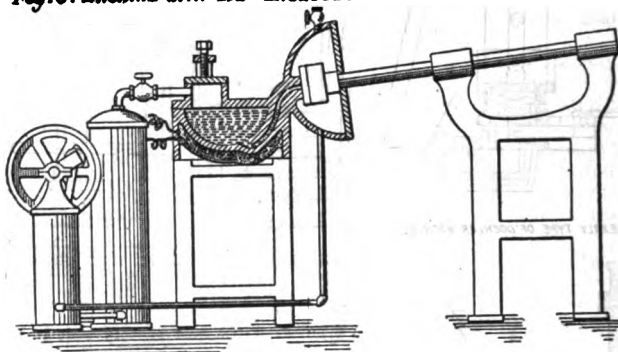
ANOTHER TYPE OF COMPRESSED-AIR MACHINE.
